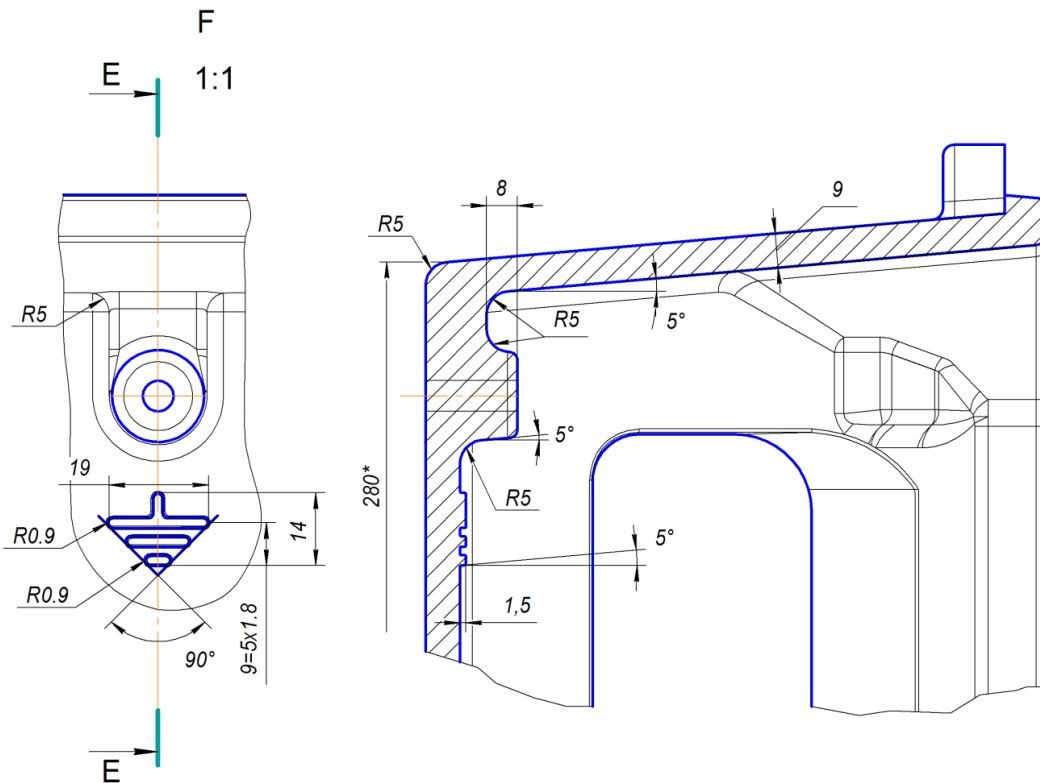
The drawing of the part «Frame of the terminal box 5AMN 315». Removal element F, cross section E-E.
